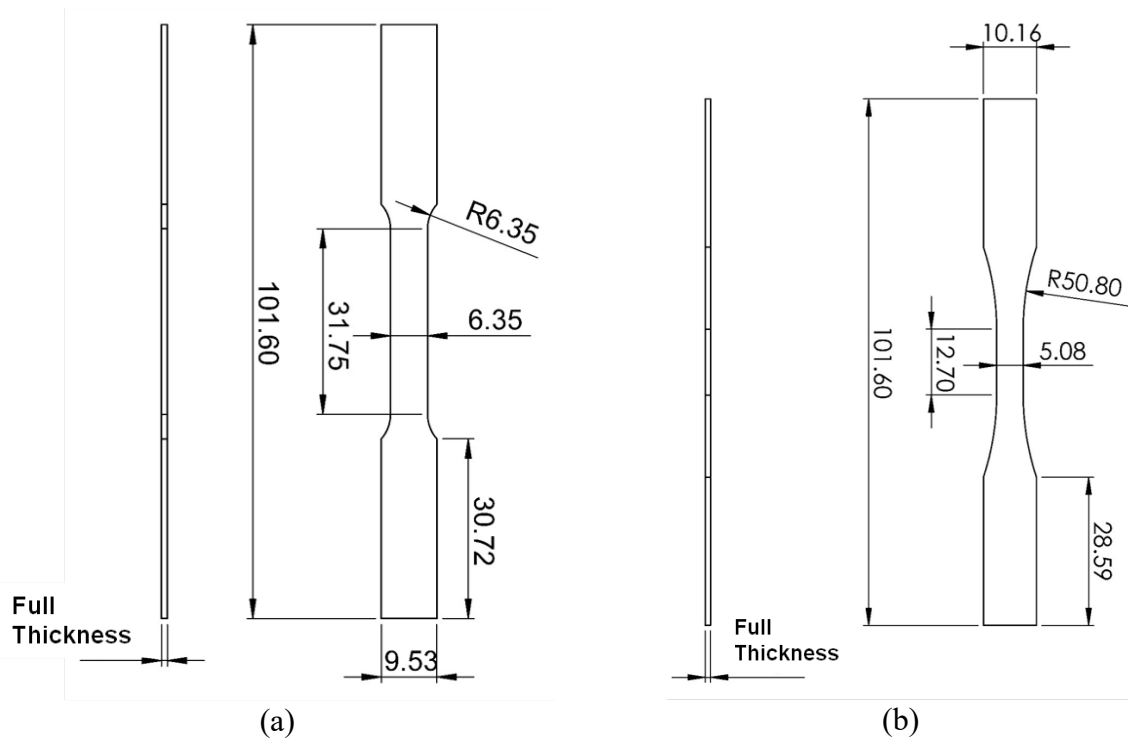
The geometries of ASTM E8 subsize rectangular tension test specimen in (a) and ASTM E466 fatigue specimen with tangentially blending fillets between the uniform test section and the ends in (b). All dimensions are in mm.
